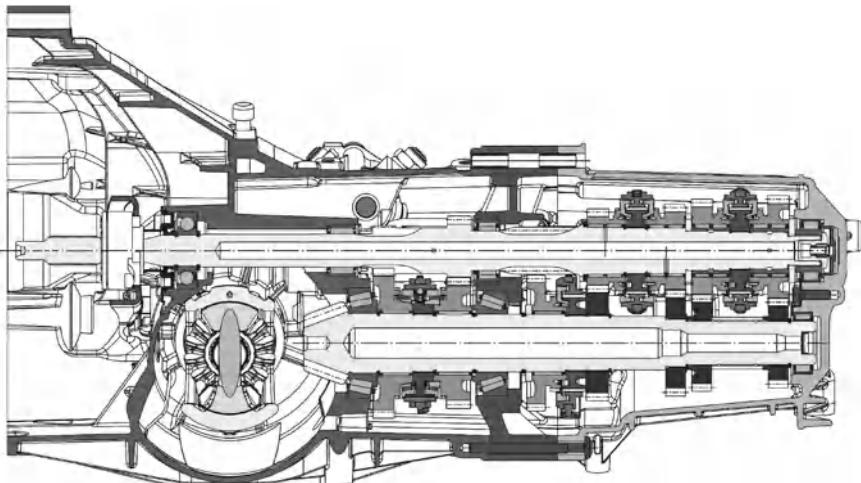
Single stage six speeds gearbox for longitudinal front engine (courtesy of Audi)
